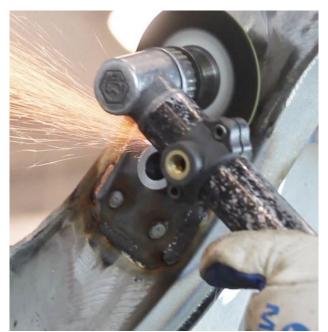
Cut-Off Crush Tube Flush with Frame Rail
